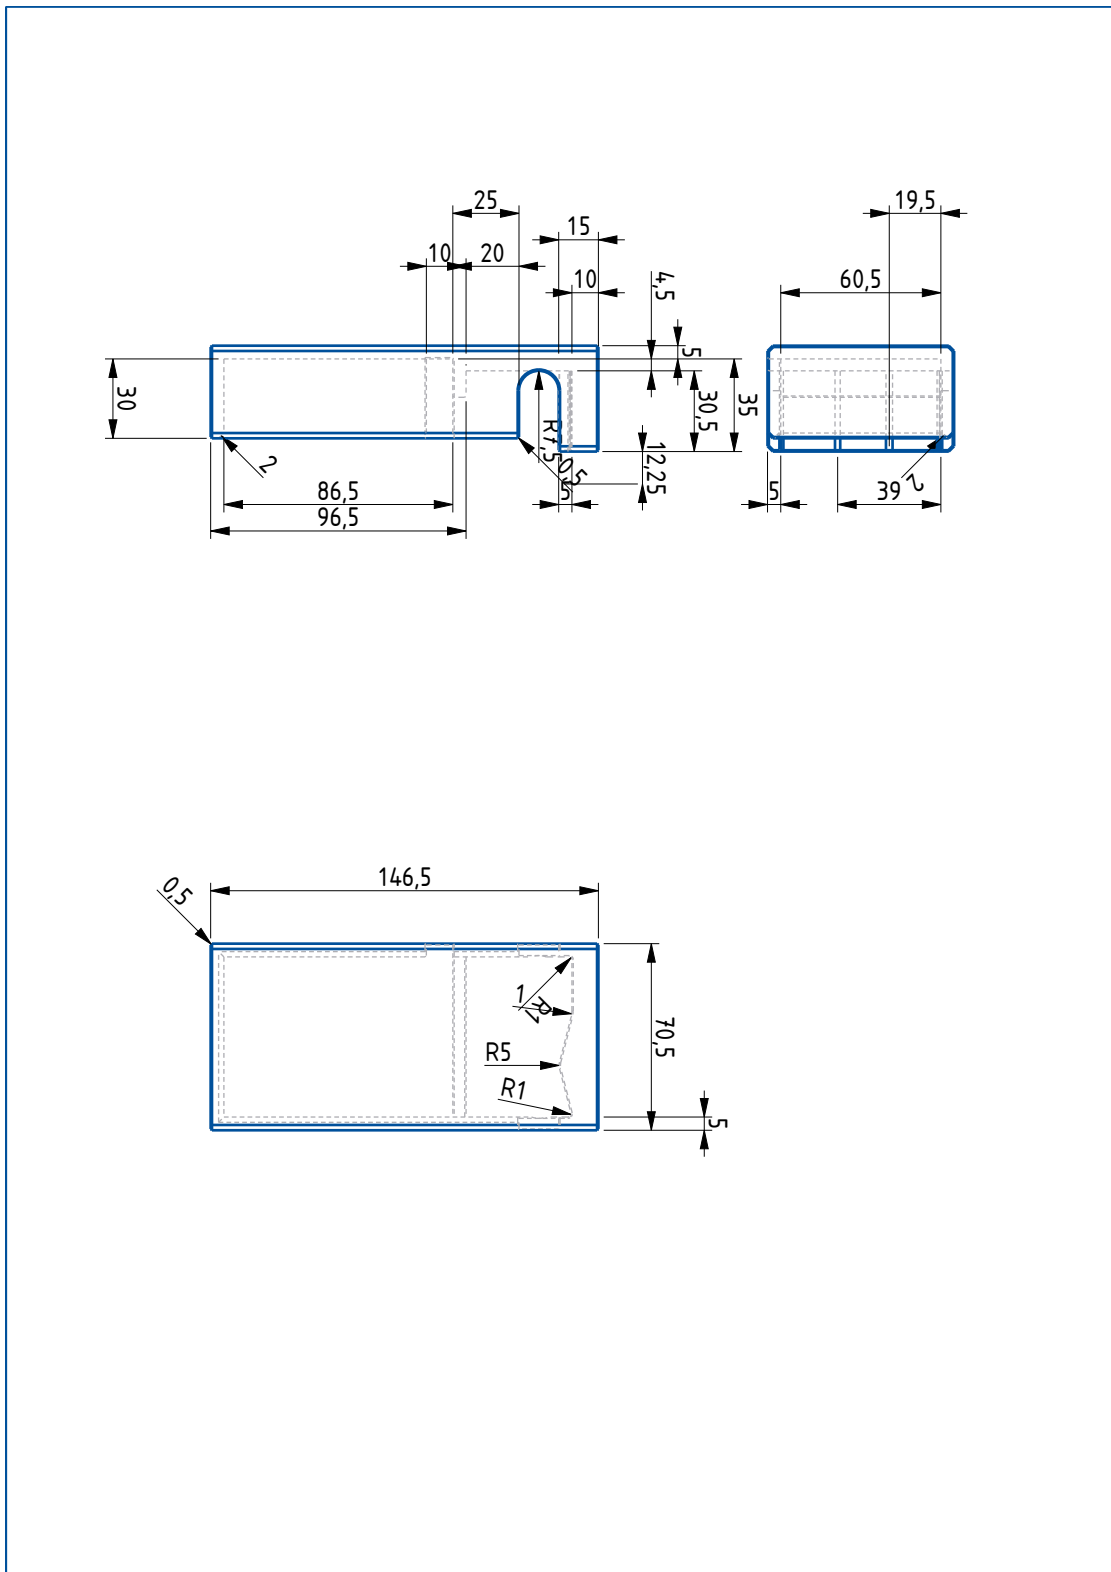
Technical drawing of the 3D printed case of the resistor in *mm*.
